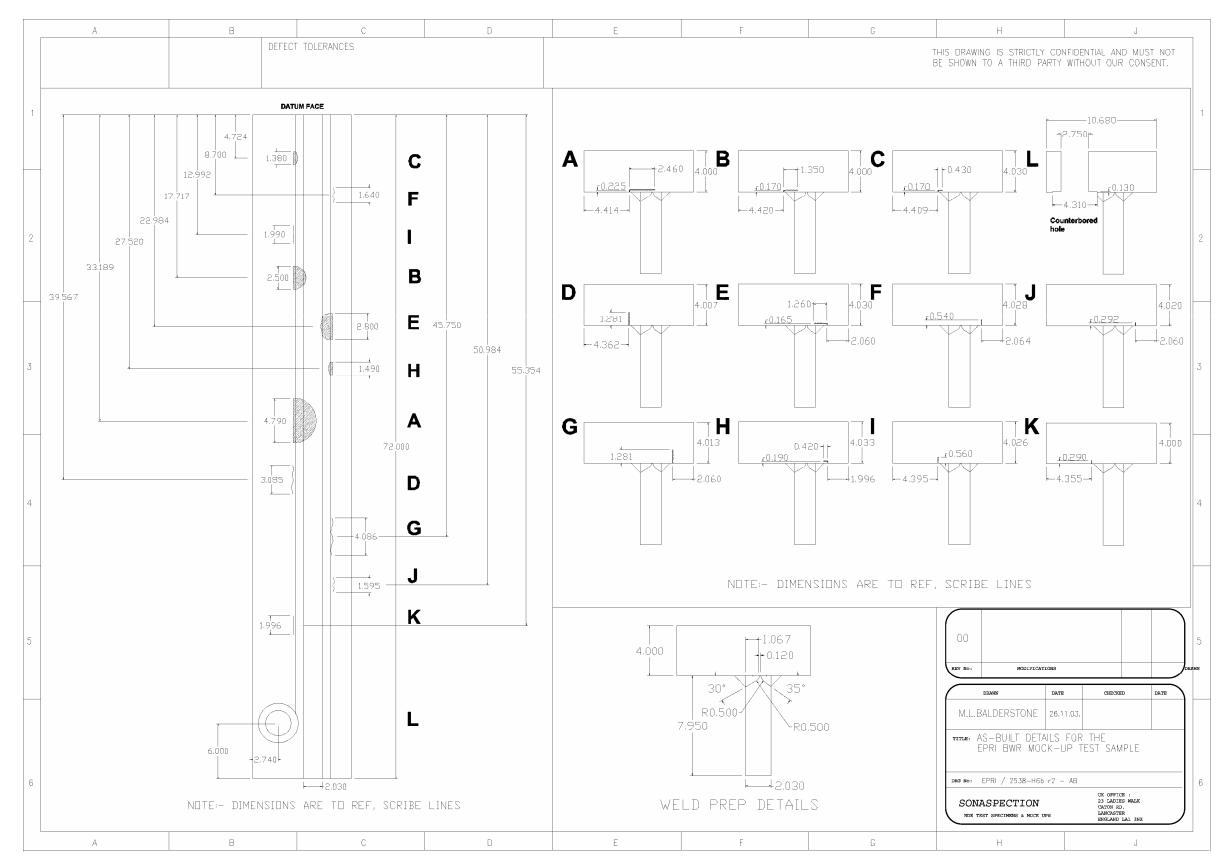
BWRVIP-H6OH, Representing the Overhanging Core Plate Support Ring Weld Configuration
